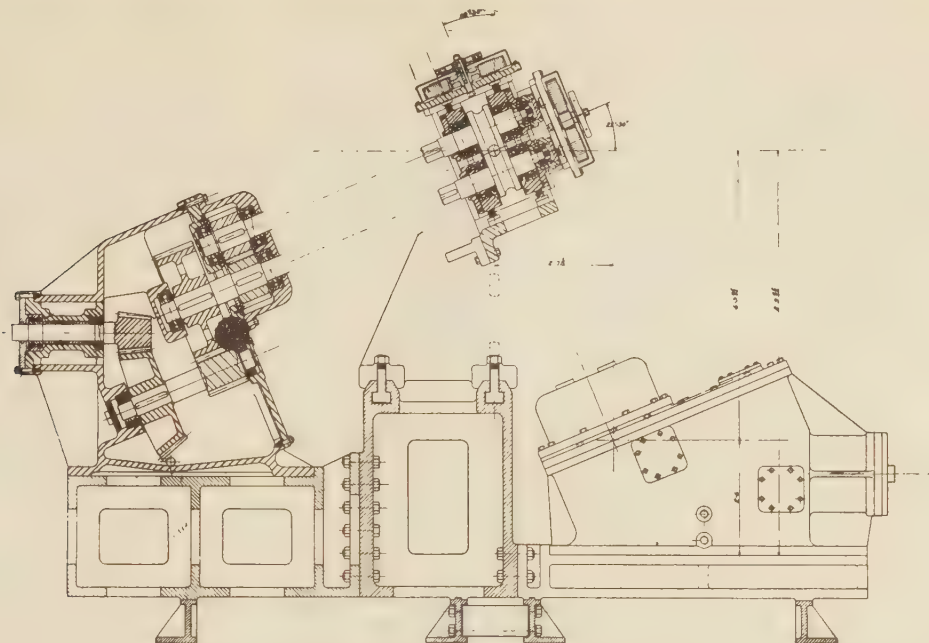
TYPICAL ROLL STAND GIVING 45-DEG ANGULAR CONTACT BETWEEN ROLLS, ALSO SHOWING CROSS SECTION THROUGH GEAR DRIVE DESIGNED FOR 22-DEG 30-MIN ANGLE
